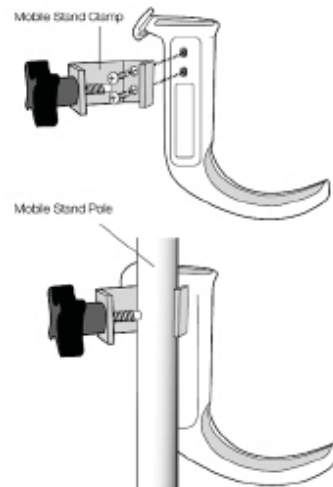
Attaching the GlideScope® Cobalt cradle to the mobile stand.
